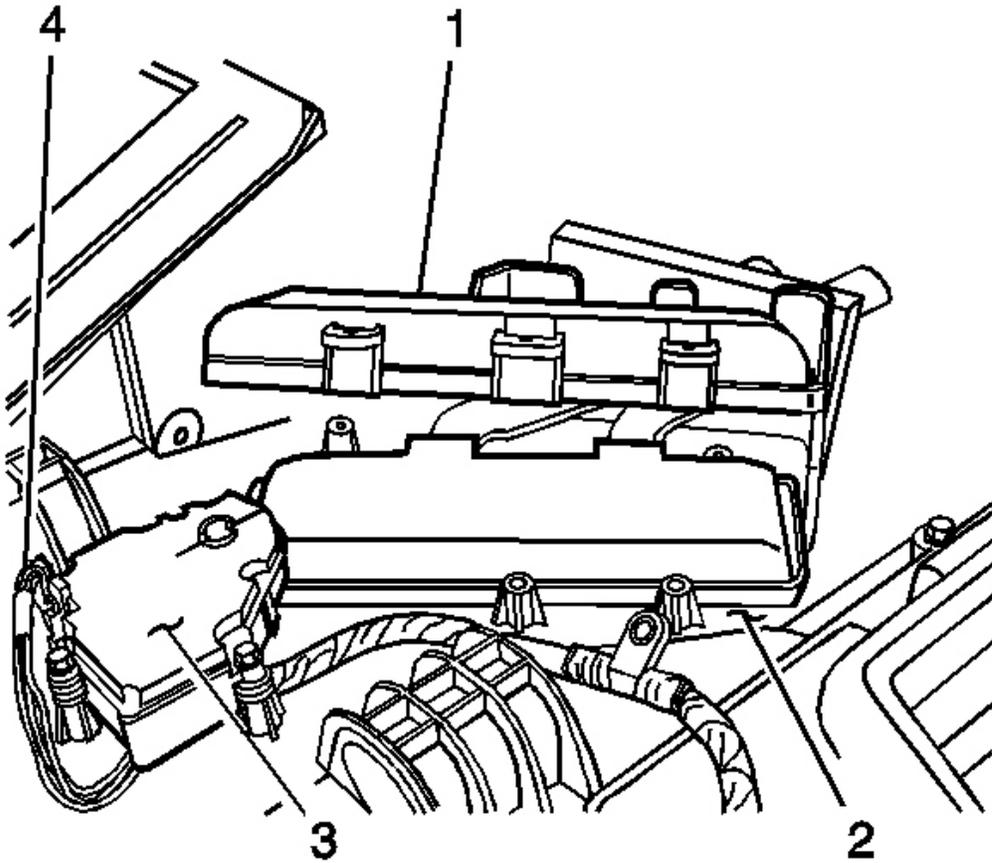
Right Air Temperature Actuator & HVAC Module Assembly (Visteon)
